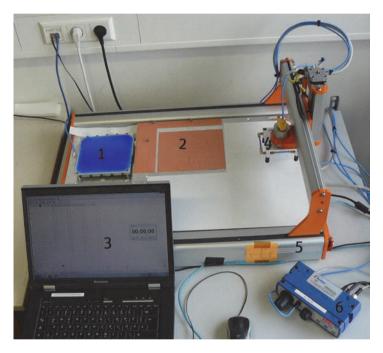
photo of the assembly unit; 1: Zebra cell on small vacuum chuck; 2: CBS for one-cell-module on big vacuum chuck; 3: Control Software; 4: Tool (dispenser or cell grabber); 5: CNC-System; 6: Dispensing unit
